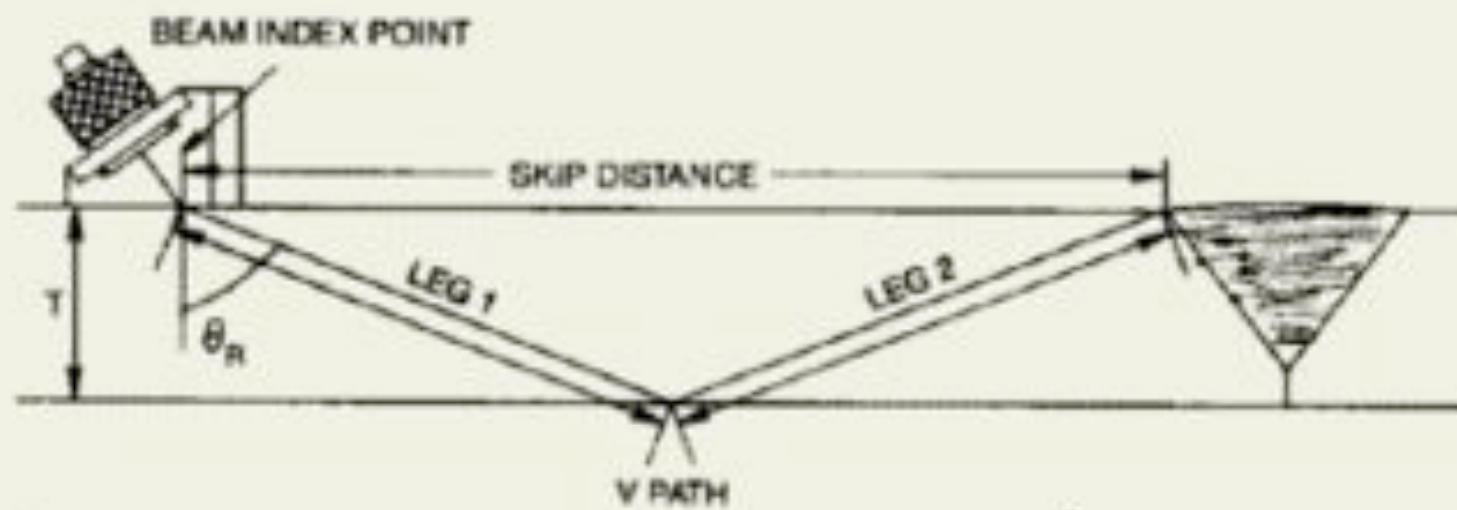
Inspection method according to "NDI Procedure of Continuous Welded Rail"
